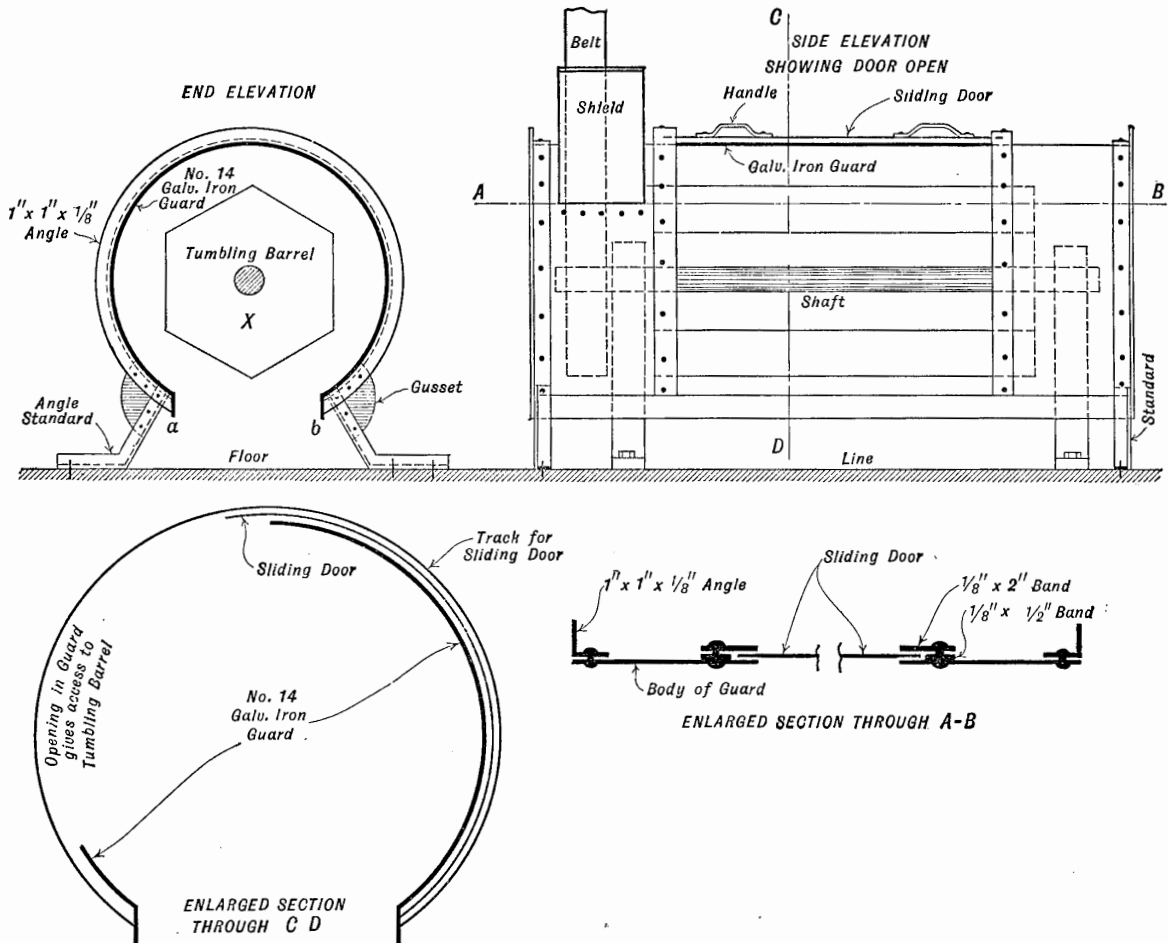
Constructing Safety Guard Around Tumbling Barrel
